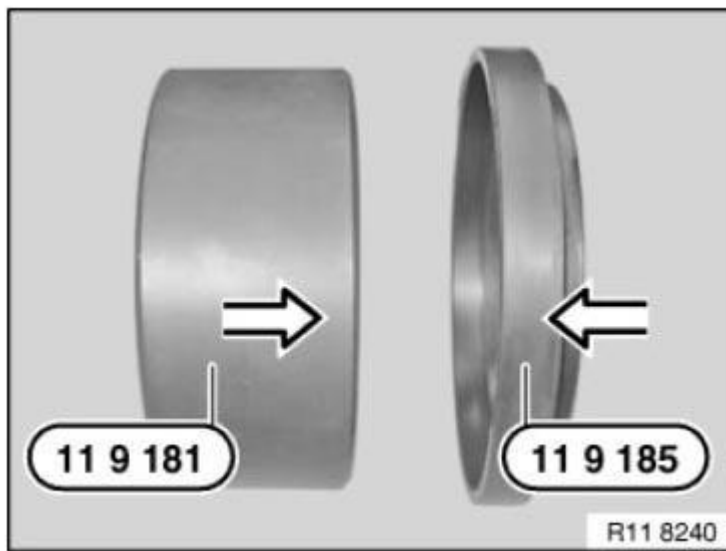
Connecting Special Tool 11 9 185 Onto Special Tool 11 8 181
